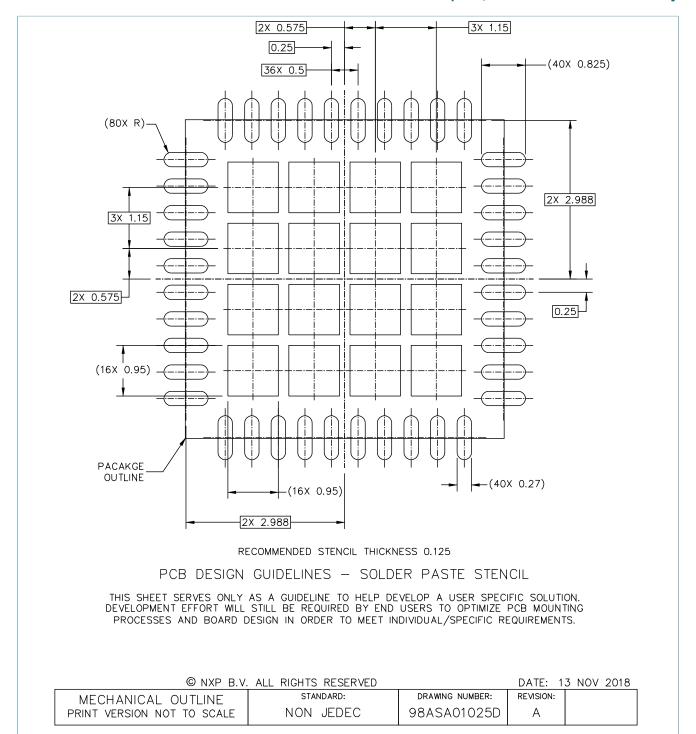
Reflow soldering footprint part3 for HVQFN40 (SOT618-13(DD))
